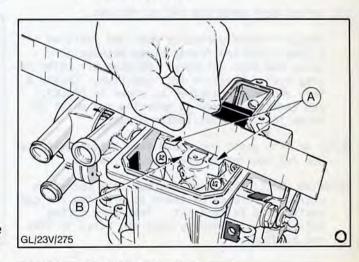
Main jet body adjustment. A - Alignment flanges B - Main jet body
